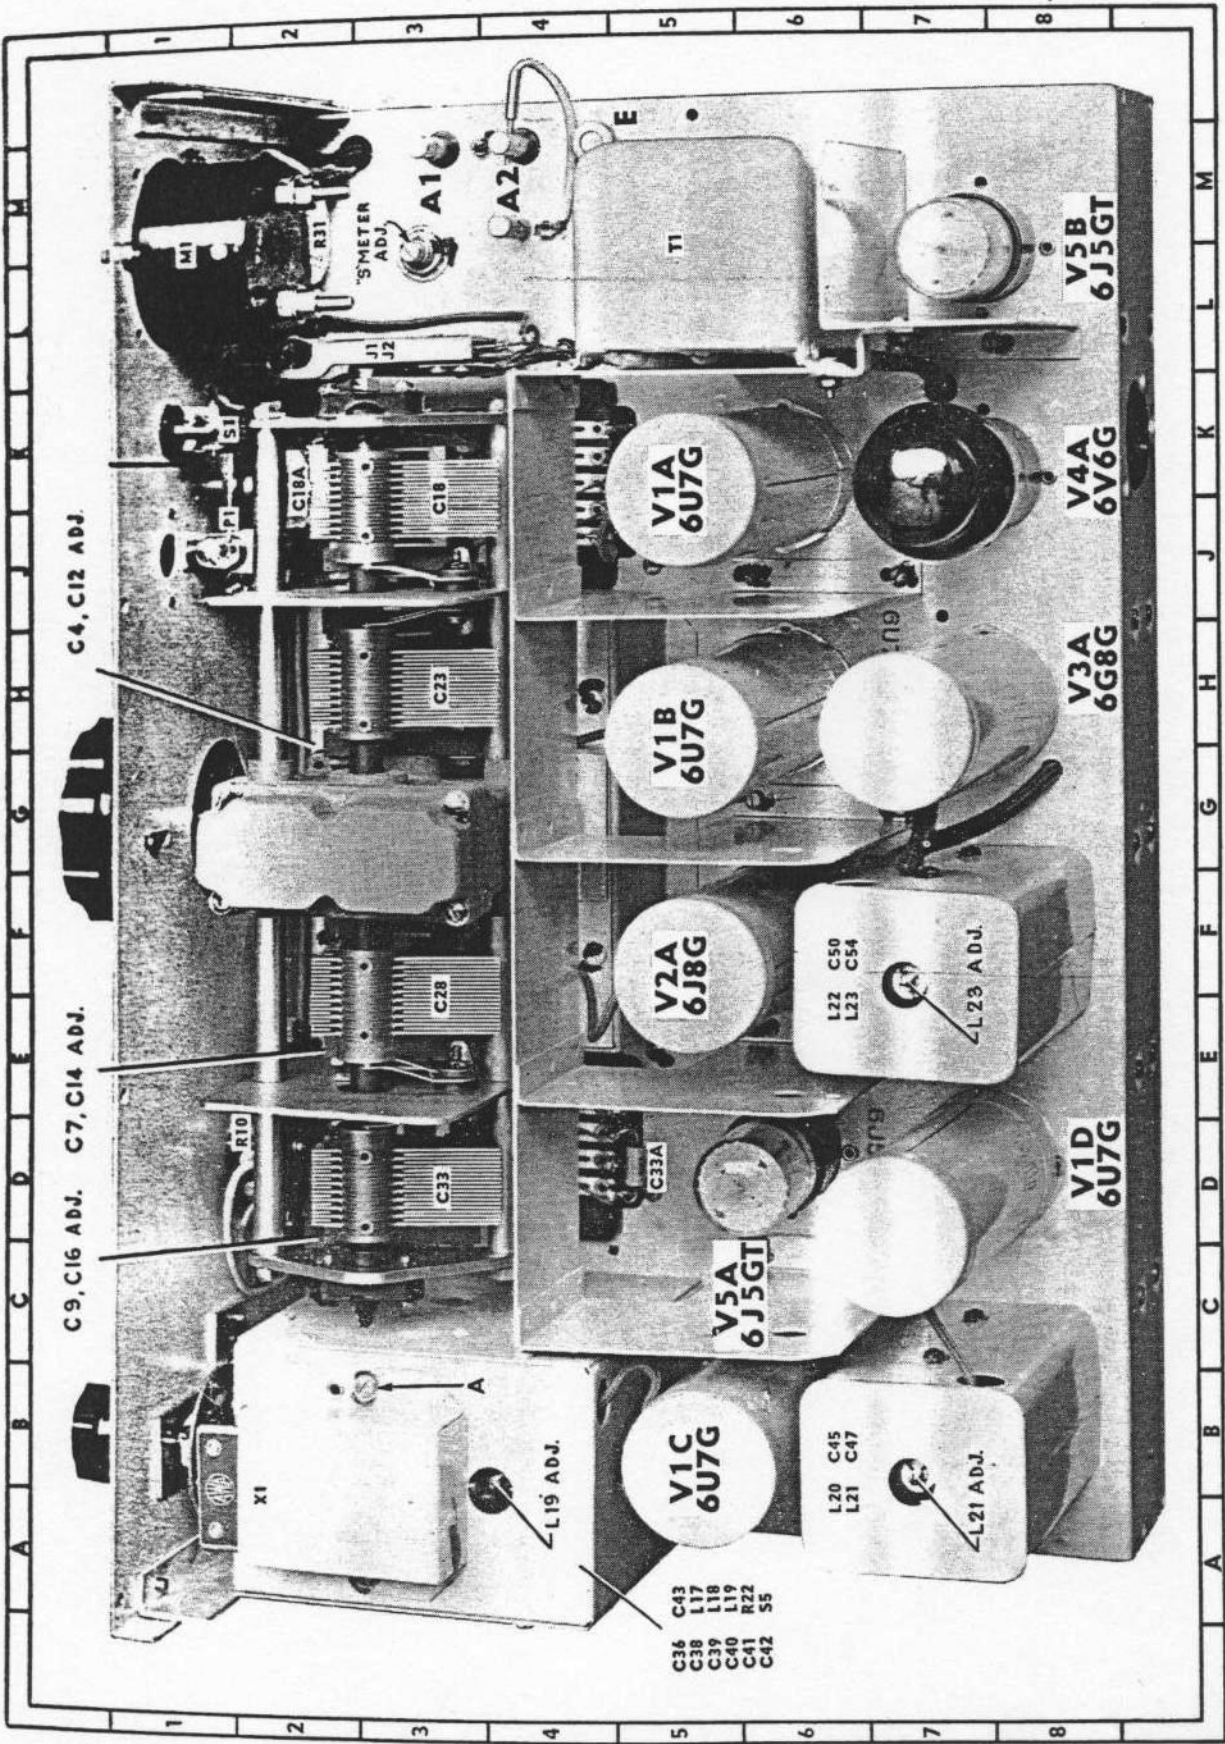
RECEIVER CHASSIS—TOP VIEW.
